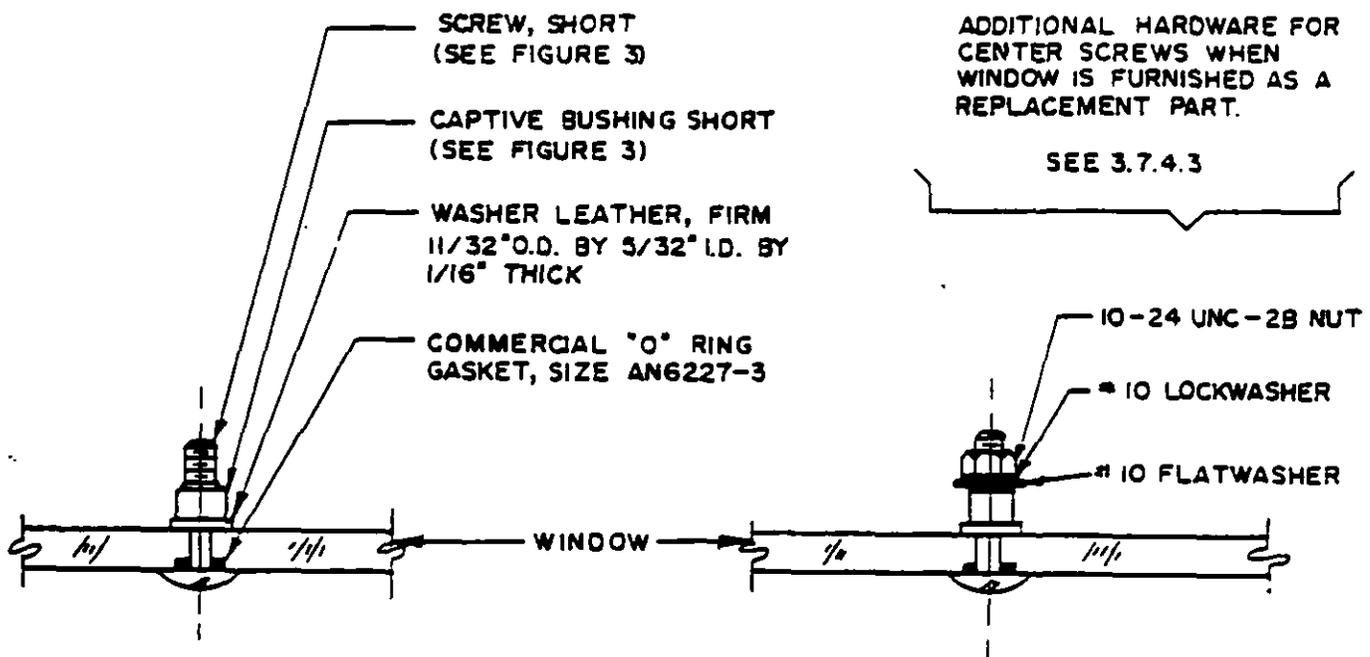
Securing screw assembly (short) for watertight window assemblies.
